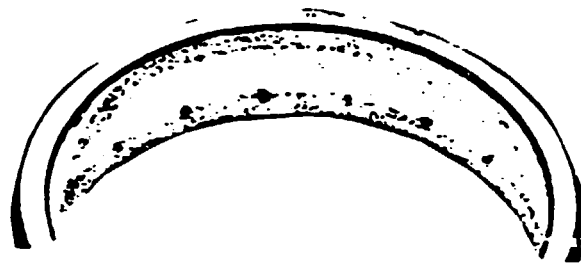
Dents in ball spacing at one edge of the external race of a low self-aligning roller bearing 1210 due to defective installation.
